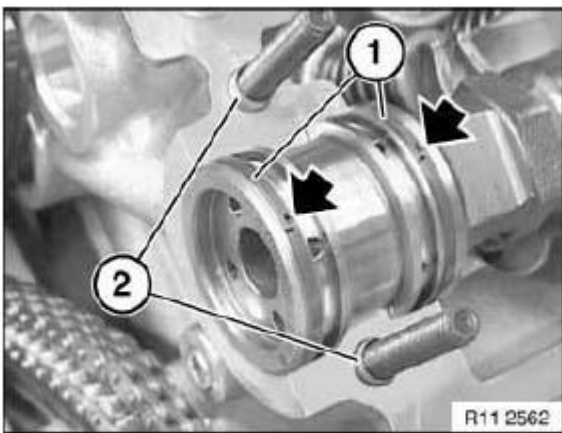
Identifying Compression Rings And Dowel Sleeves
